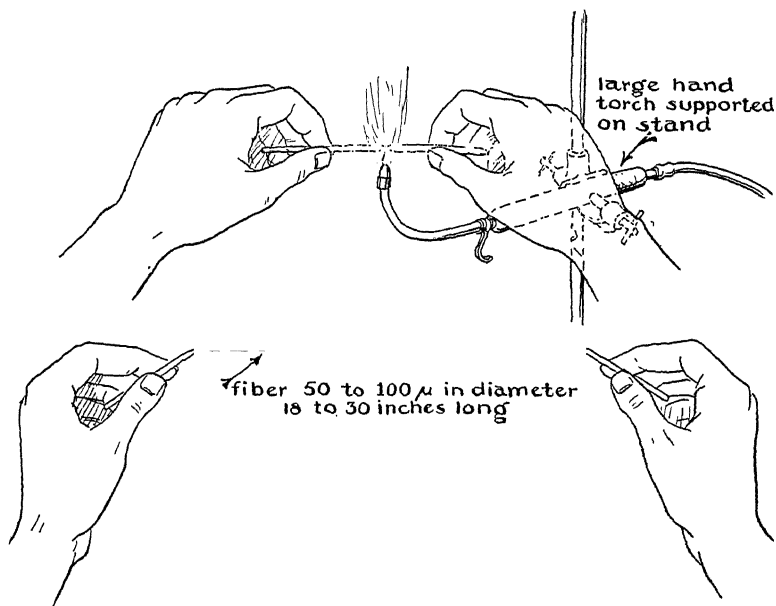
The first step in making a small fiber is to draw a larger one. A very hot flame is used.
